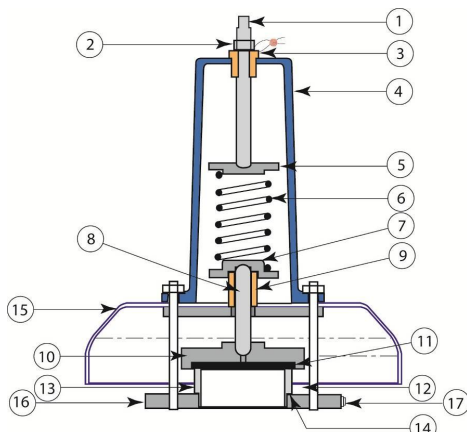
Safety valves of the open type with spring; 1-Adjusting screw, 2,3-Nut, 4 - Cap, 5- Spring holder, 6- Spring, 7- Spring holder,8- Pin,9- Bearing,10 - Clapper, 11- Clapper gasket, 12- Upper stem, 13- Seat, 14- O'ring, 15- Skirt,16- Flange, 17- Pressure 1/2'gas
